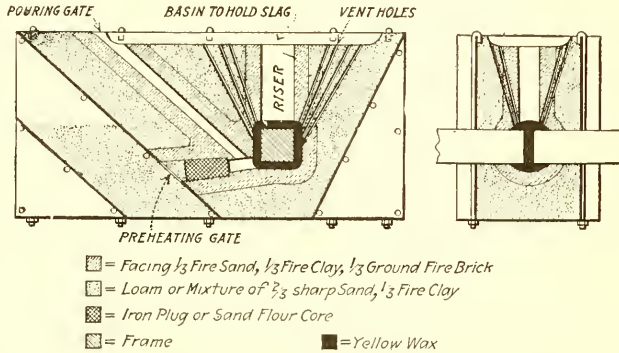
Typical Thermit Mold for Heavy Sections.
